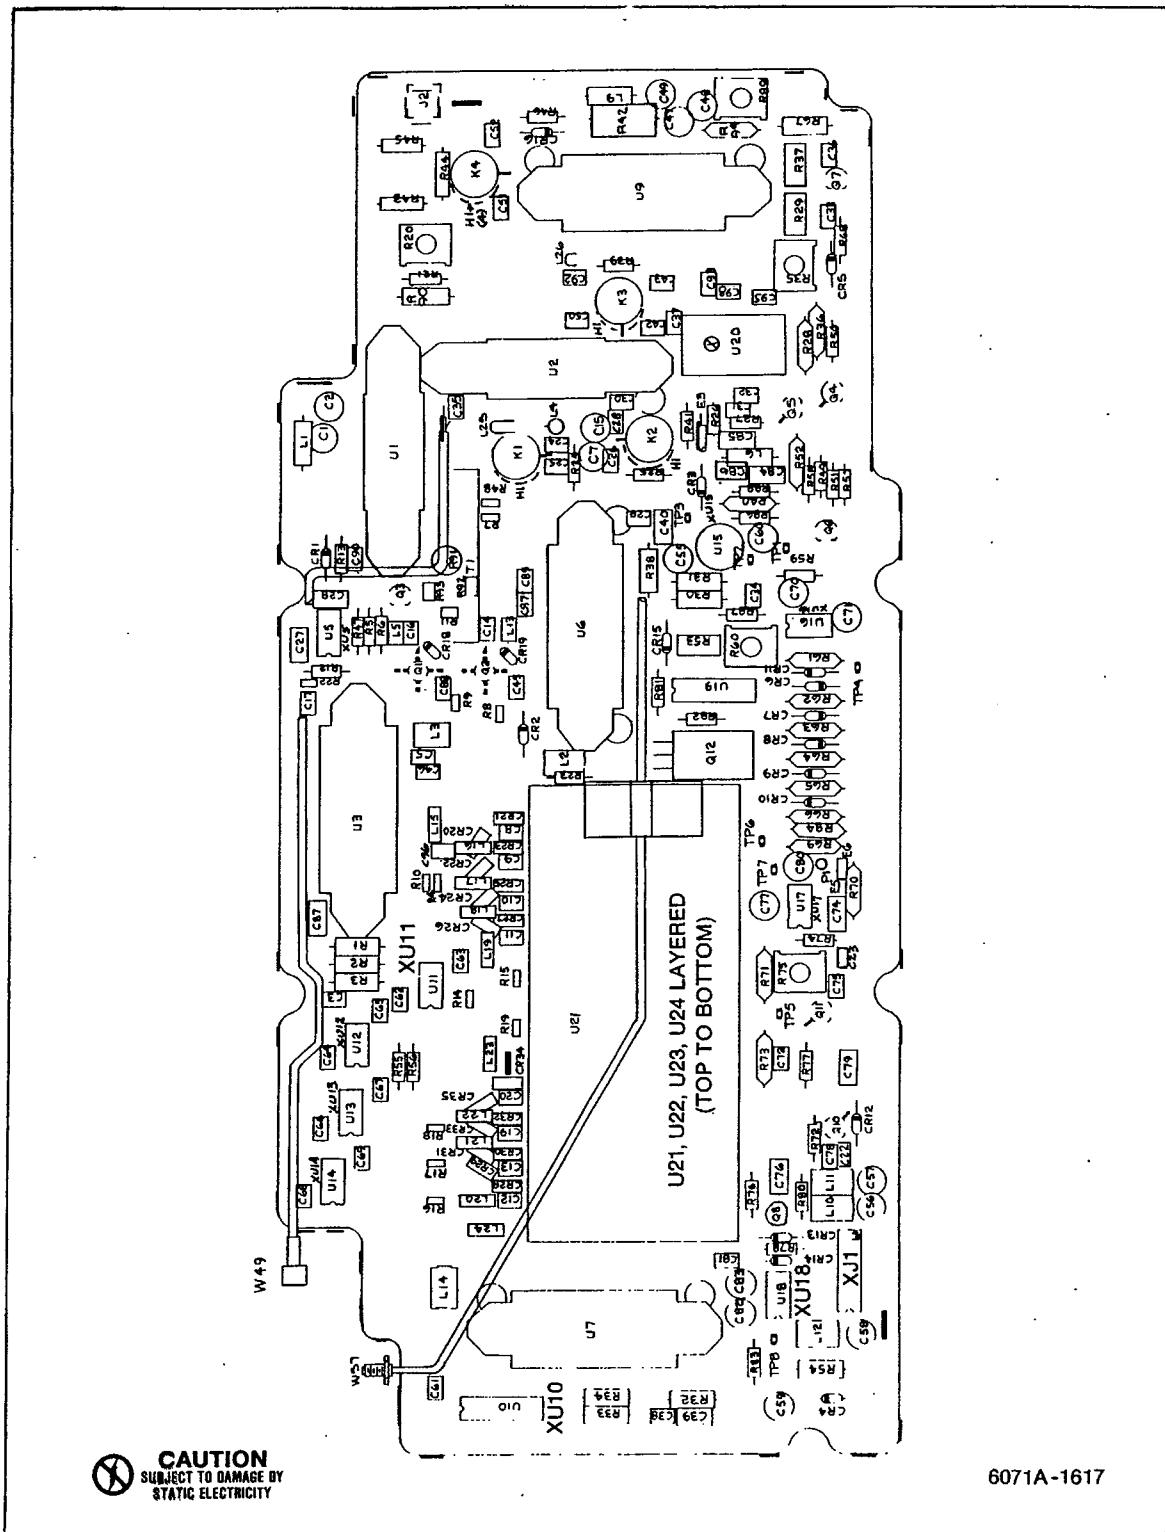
A4A6 X2 Output Amplifier PCB Assembly (6071A)
